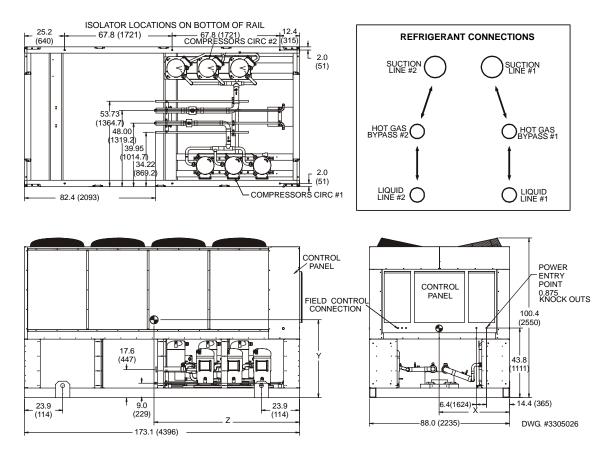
, Dimensions: ACZ 090B - 110B AGZ 075BM - 090BM
